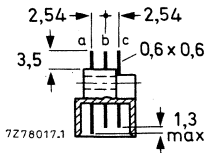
Straight dip-solder pins, with protruding earth contacts.
